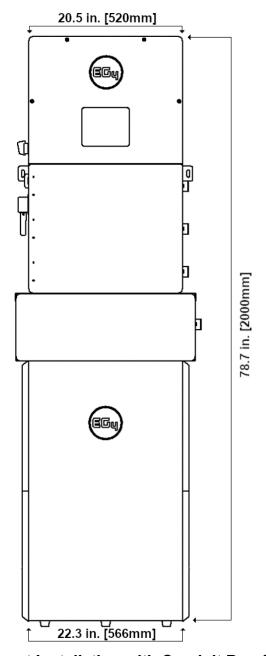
WallMount Installation with Conduit Box & 12/18kPV Final
